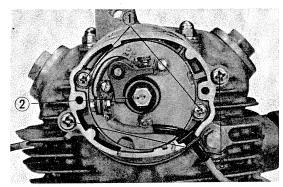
① 5mm screws ② 6mm bolt ③ 6mm screws
